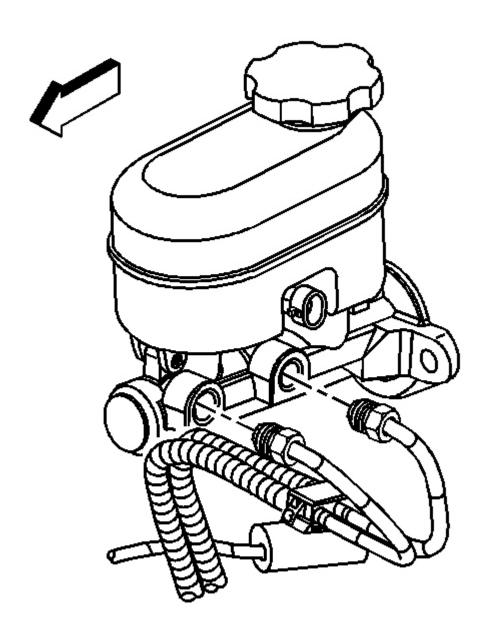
Removing/Installing Master Cylinder Brake Pipes Courtesy of GENERAL MOTORS CORP.
